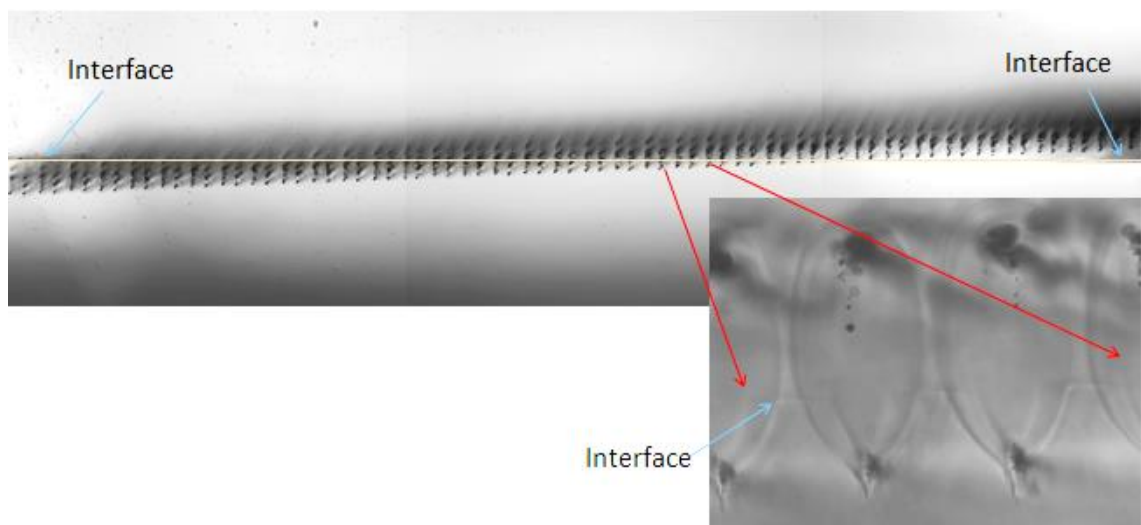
Weld with cracks around (borosilicate glass to fused silica, laser power: 1.32 W with scan speed 1 mm/s. weld seam separation is 80 μm).
